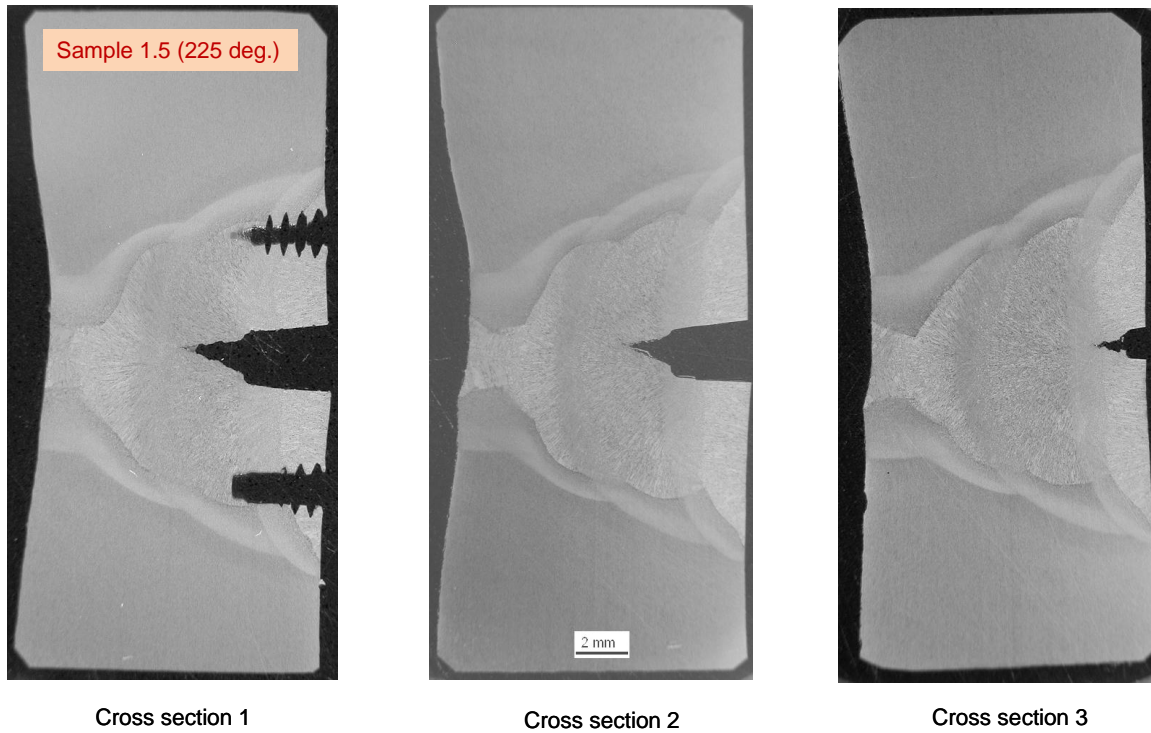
Multi-cross-sectional view of a flaw located in the weld
